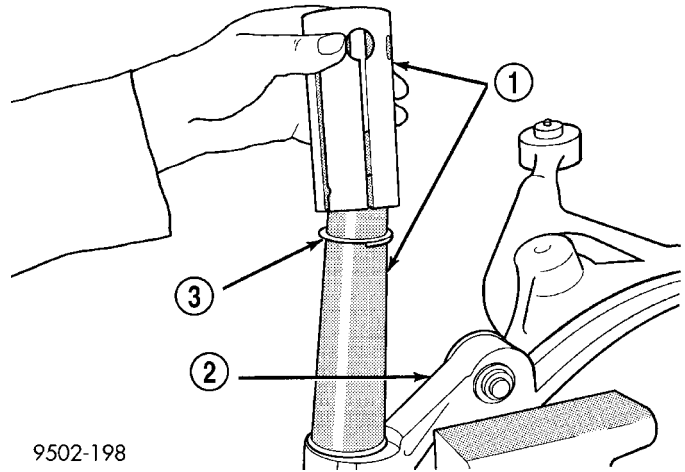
Retaining Ring And Expandable Collar Installed On Tool
